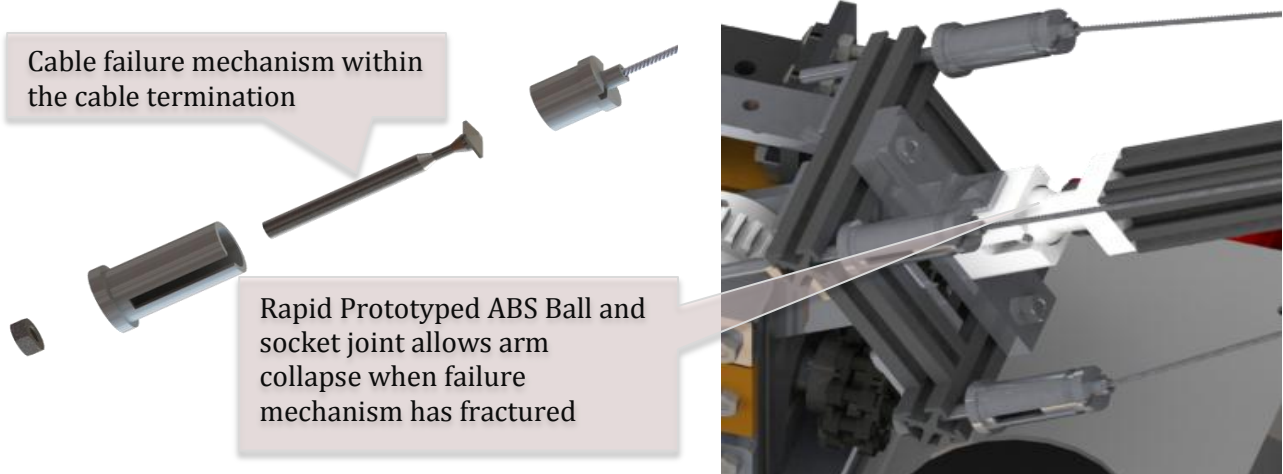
Cable Termination Failure Mechanism with Ball & Socket Joint
